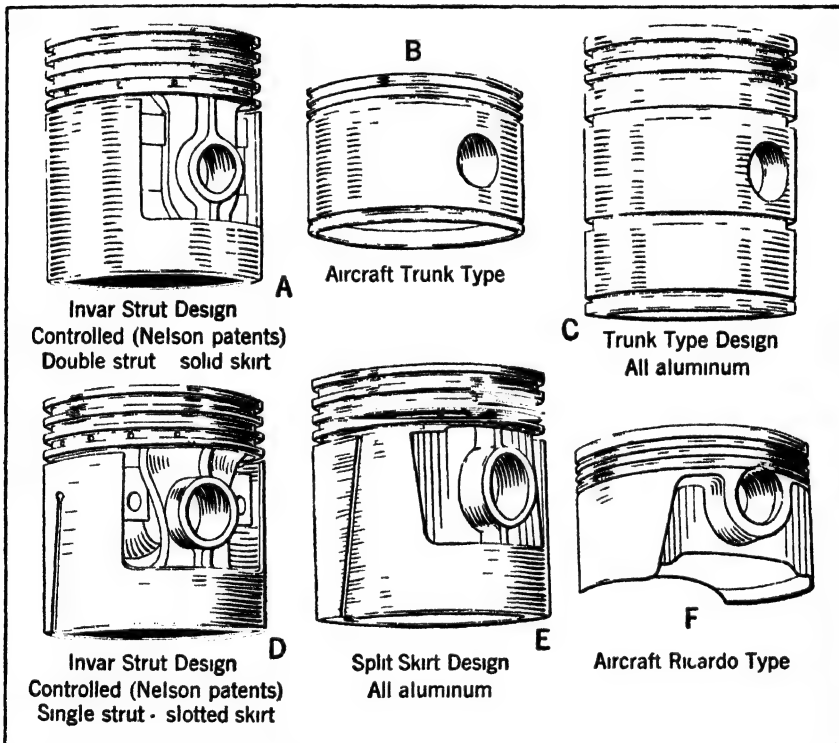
Some Typical Alloy Pistons Suited for Modern Automotive Engines. A—Double Invar Strut Design. B—Aircraft Trunk Type. C—Marine and Oil Engine Trunk Type. D—Single Strut, Slotted Skirt Design. E—Split Skirt Design. F—Ricardo Type.
